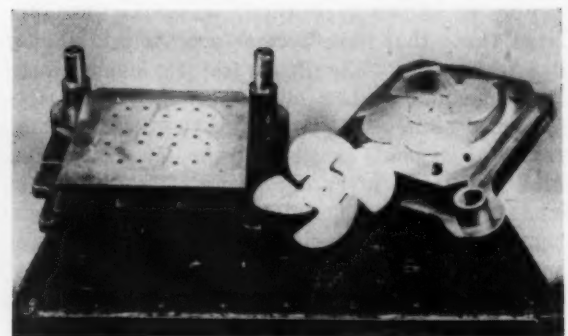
Compound die for piercing and blanking 10 in. fan blades from 22 gage cold-rolled steel.
